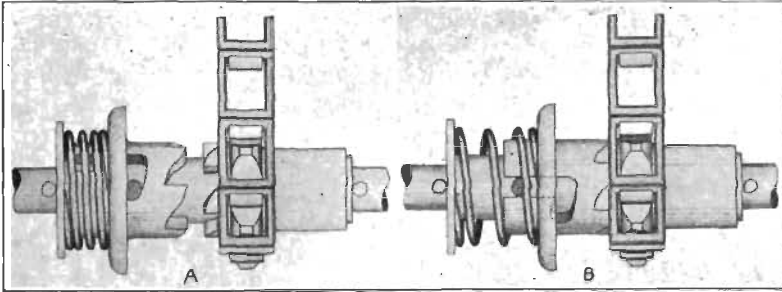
Positive type of clutch: A, clutch parts disengaged; B, clutch parts engaged to transmit power.
